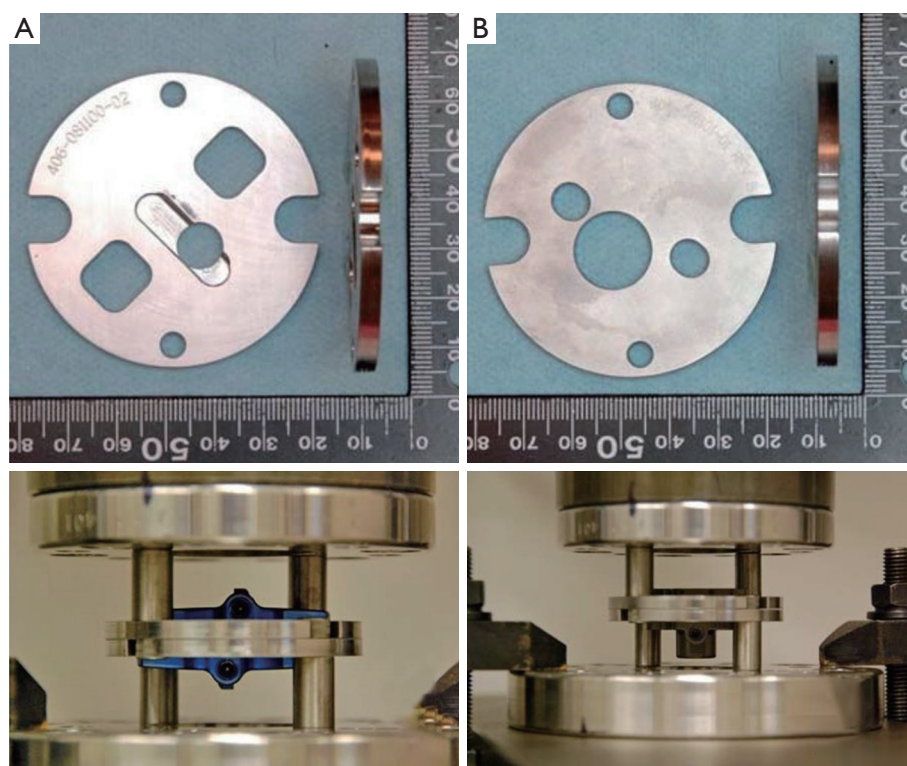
Disassembly fixtures and set up construct of InSpan (A) and Aspen (B) for static disassembly test.
